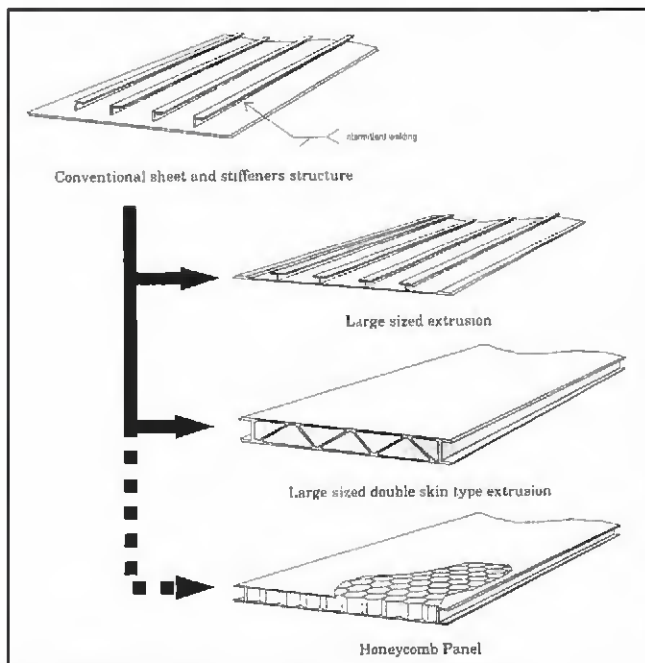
Large extrusions of aluminum alloys used on car bodies.
